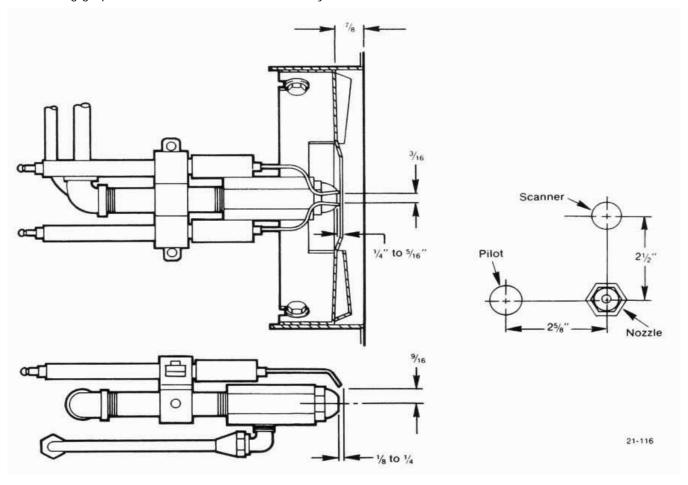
MM 14-30 Drawer Assembly Dimensions
